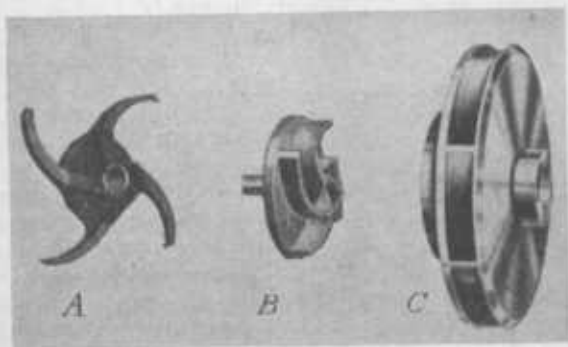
Typical centrifugal pump impellers; A, Open impeller; B, semi-enclosed impeller; and C, closed impeller.
